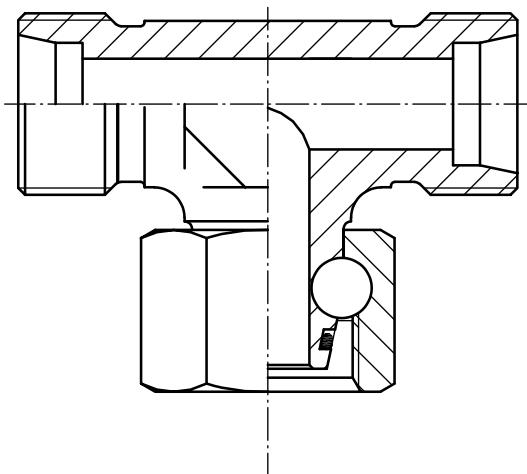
Branch tee (SWOBT) reducer with O-Ring
